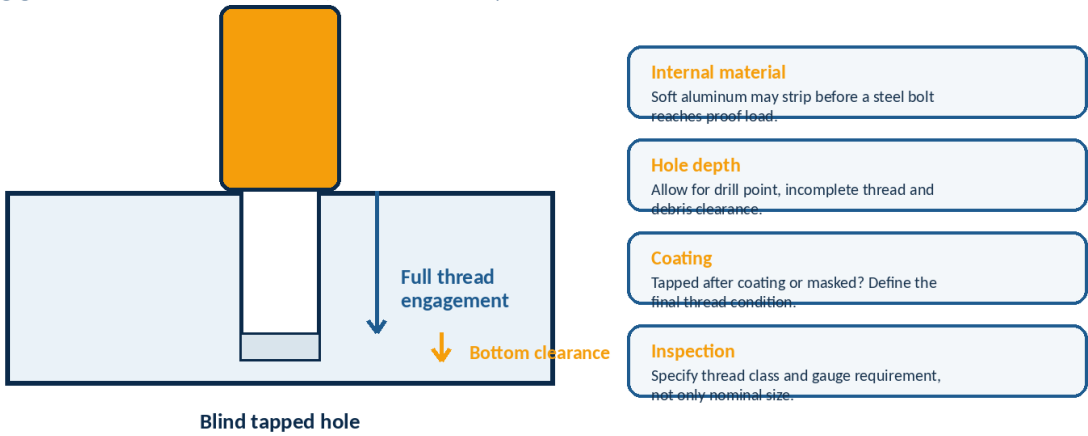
Blind tapped-hole geometry must account for complete threads, runout and bottom clearance.
